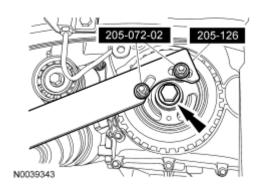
Locating Crankshaft Pulley Bolt And Special Tools (205-126, 205-072-02) Courtesy of FORD MOTOR CO.
